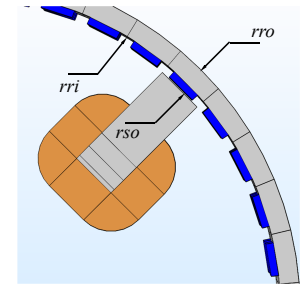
Main dimensions of the demonstrator, xy-plane.
